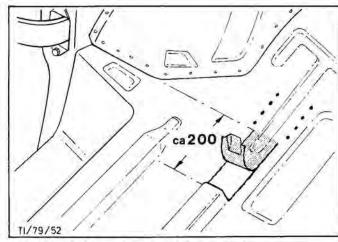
Drill out spot welds, chisel open and bend up floor panel.
